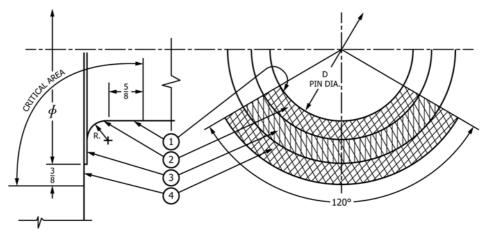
Critical Surface Areas of Crankpin and Main Bearing Journal
